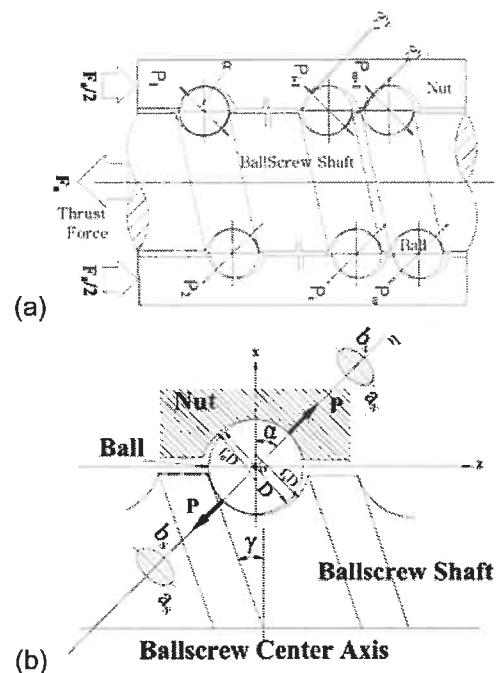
BALLSCREW GEOMETRY AND CONTACT MECHANISM.
